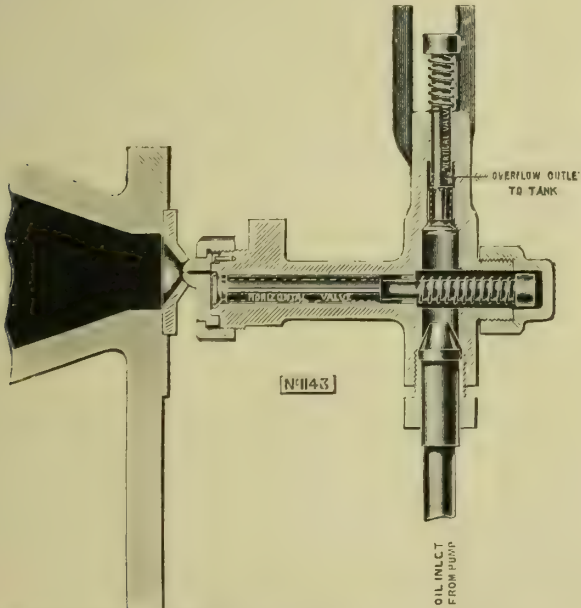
VAPORISER VALVE BOX, HORNSBY-ACROLYD OIL ENGINE.
